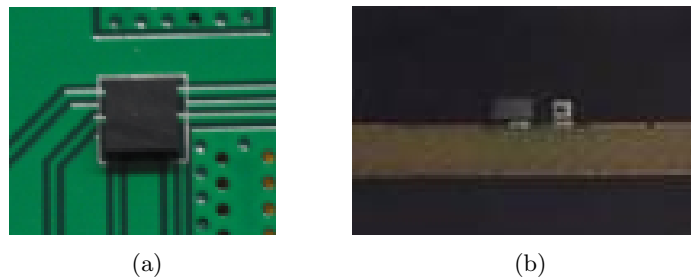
The samples used in this experiment. (a) Sensor in LGA package soldered onto a PCB. (b) Cross-section of an overmolded sample.
